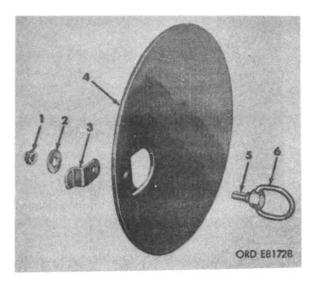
Disassembly or assembly of steering access lid—M274A2 and M274A4 models.
